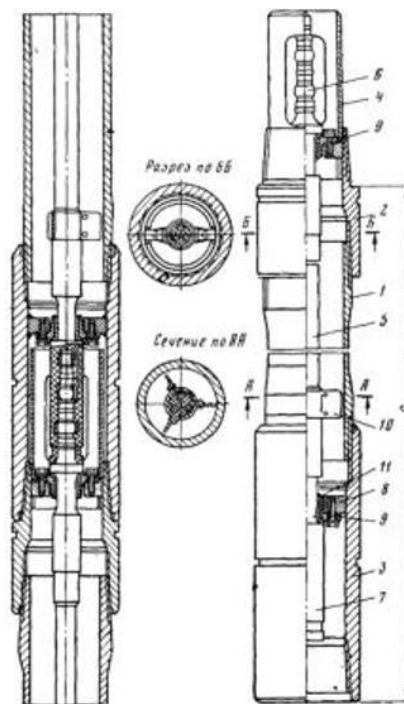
Electrical three-line drill pipe design (Fomenko F.N., 1974).
